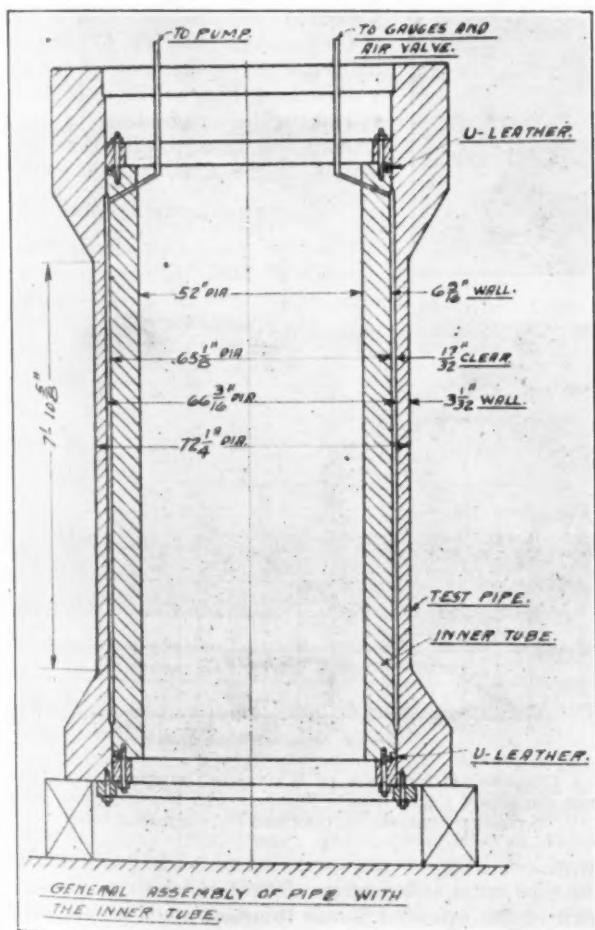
GENERAL ASSEMBLY OF PIPE WITH THE INNER TUBE
